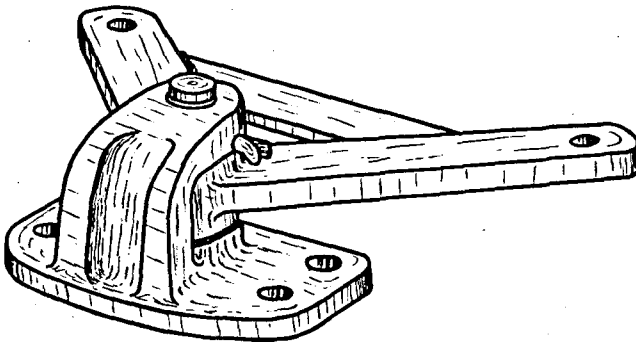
PRESENT STANDARD CRANK & CRANK STAND ASSEMBLY.
